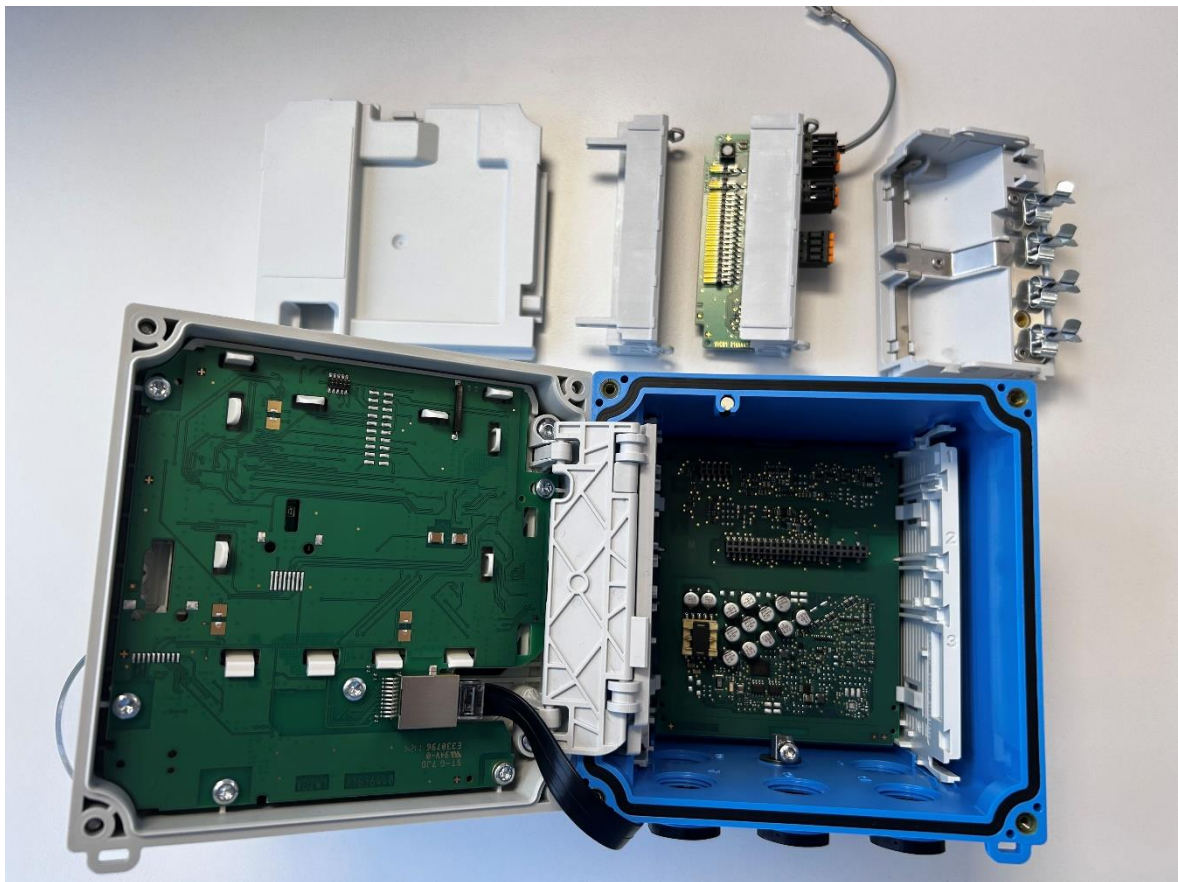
View of the Opened Top Side – Upper blanking plate removed
